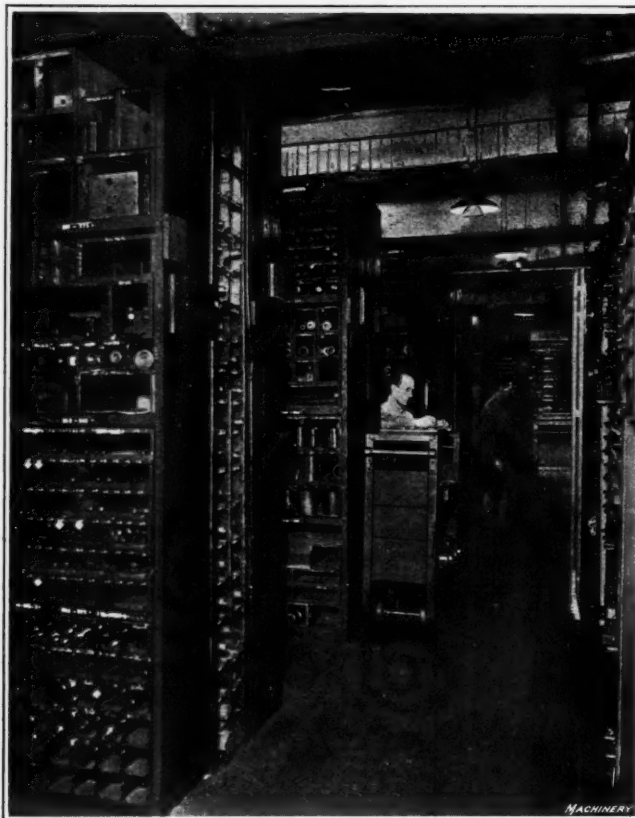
View in Tool Supply Room of Tabor Mfg. Co.
